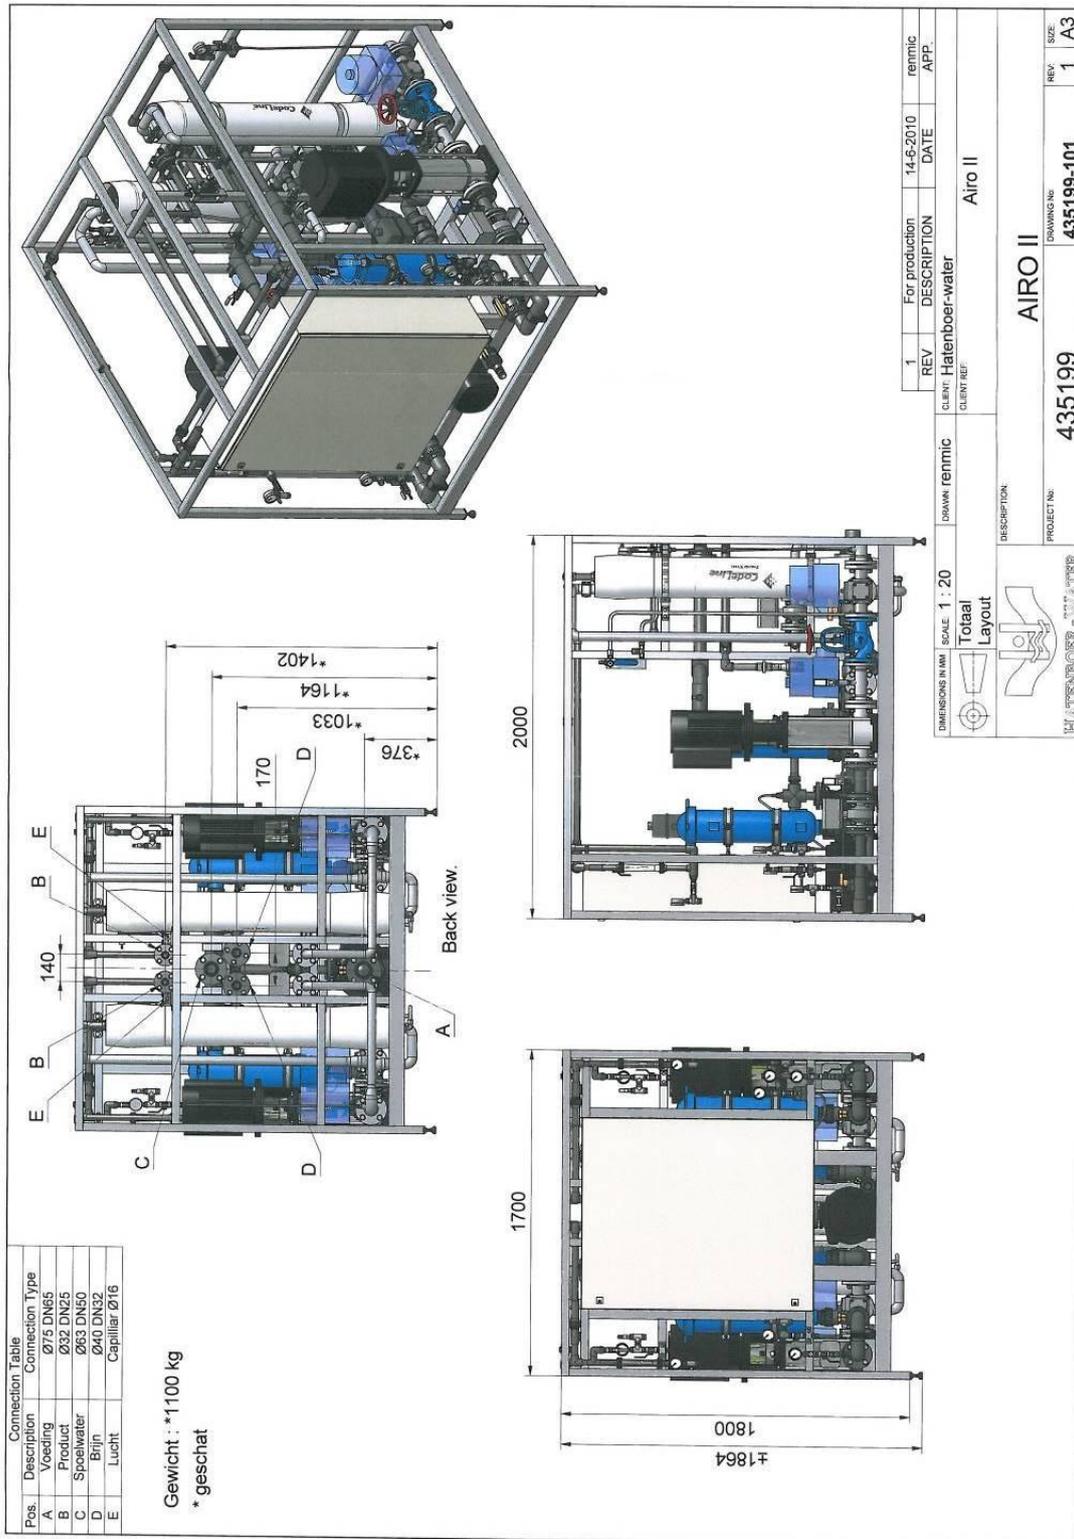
Construction drawings of AiRO pilot (Hatenboer)
